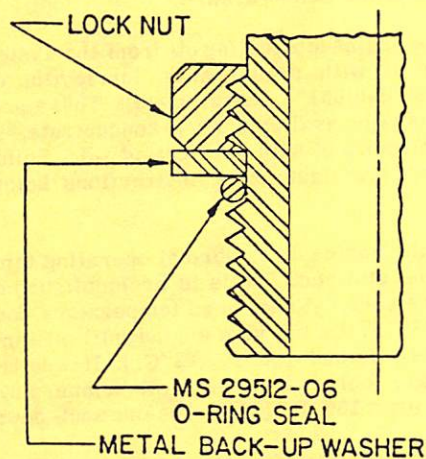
Section Thru Fitting Showing O-Ring Assembled Against Back-Up Washer
